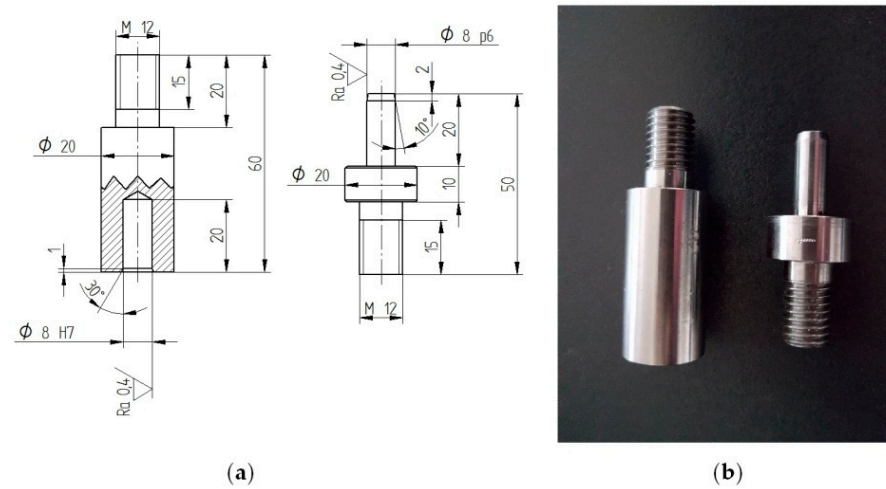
(a) Technical drawing of the joint, (b) Set before pressing.
